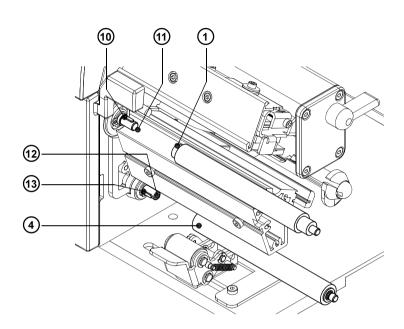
Changing Print Roller and Rewind Assist Roller (II)
